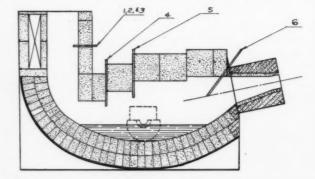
Cross-sectional view of melting furnace showing basic features of furnace construction.
